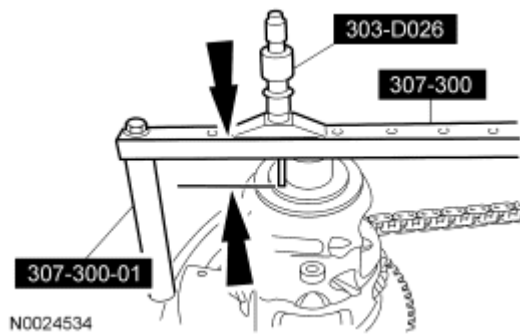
Measuring Distance From Top Of Special Tool To Shim Surface Area Of Final Drive Carrier
